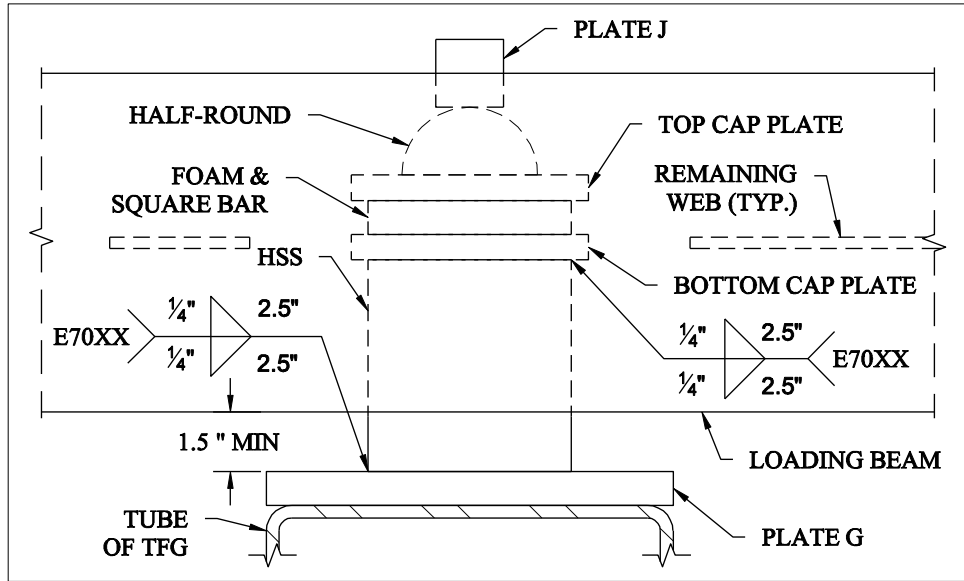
Parallel plane cross section view of load bearing assembly at Section Type B (Hampe,2012)
